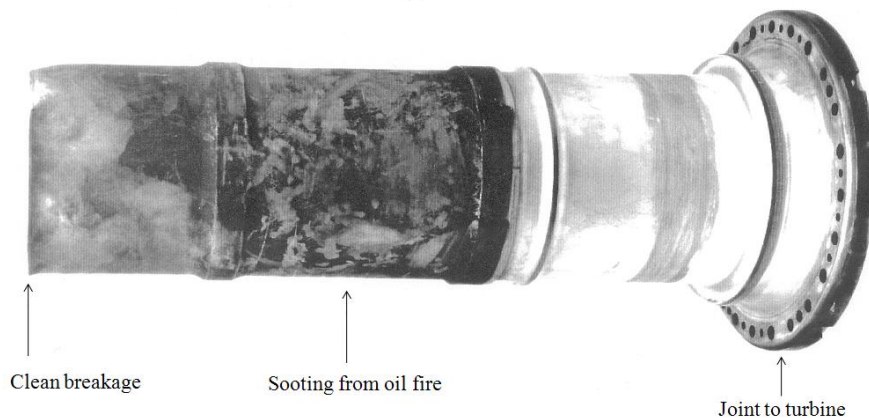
“Clean” shaft failure - Turbine end. From [158]
